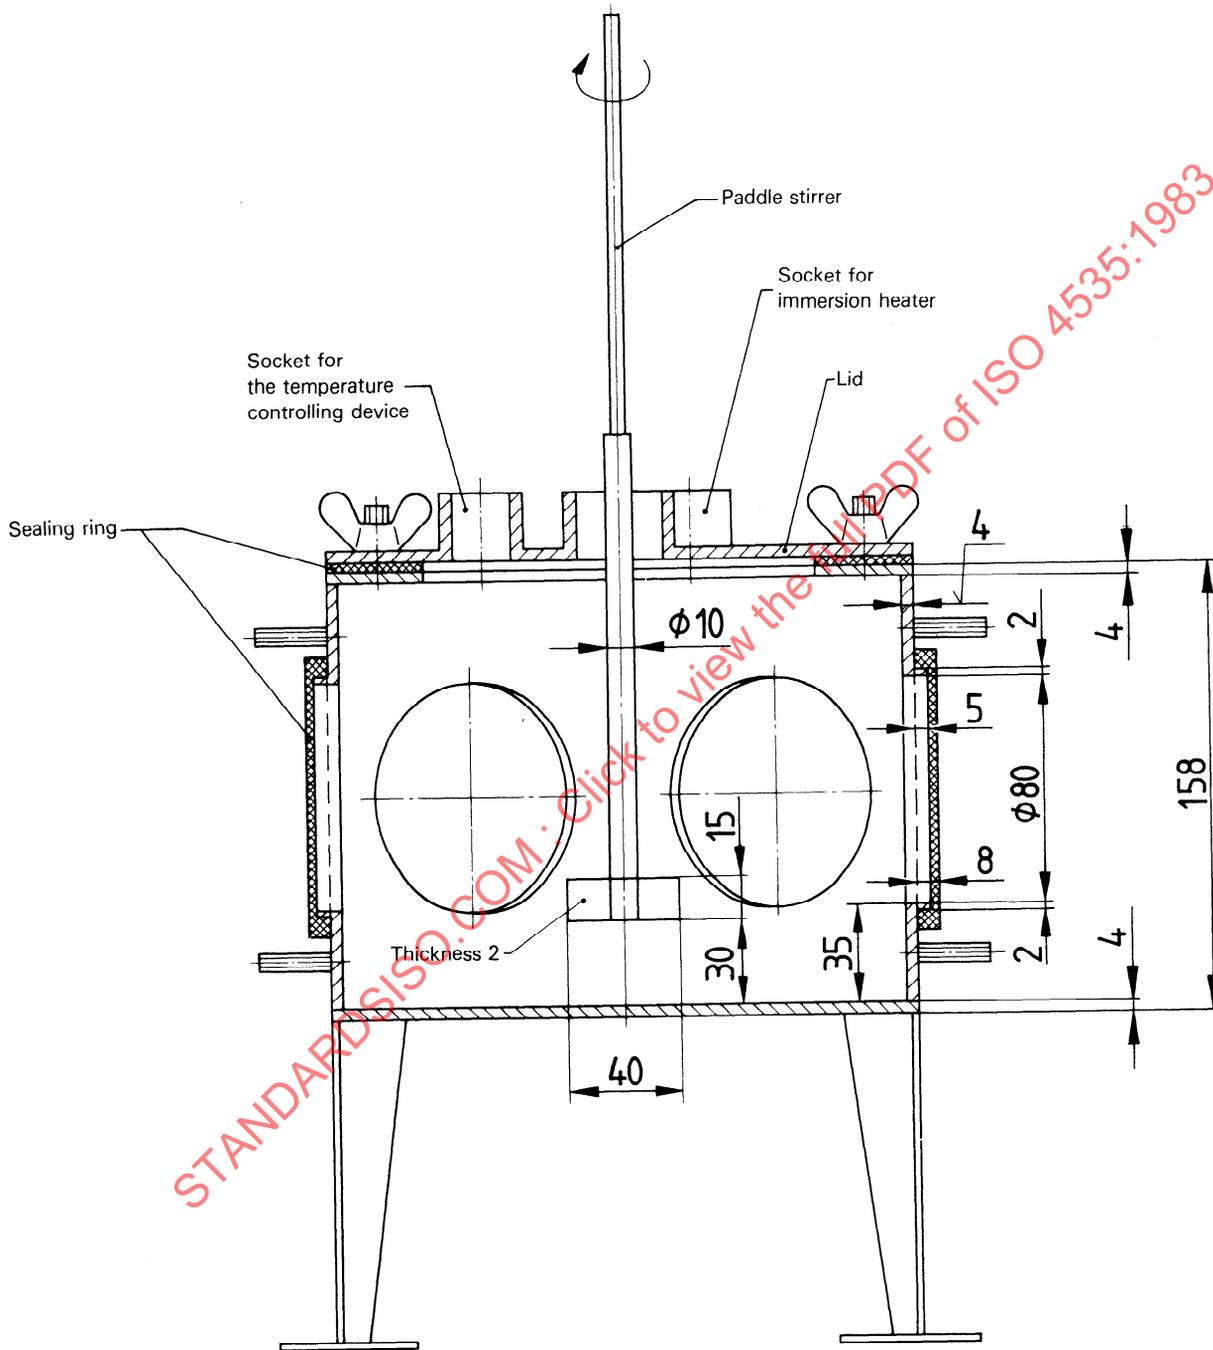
Section A-A of the hexagonal vessel, lid and paddle stirrer, with additional sealing in the cutting plane
